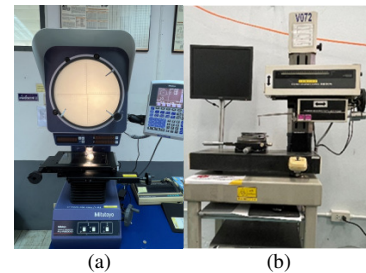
Measuring equipment: (a) PJ-A3000 profile projector and (b) CONTOURECORD 2600E contour measurement.
